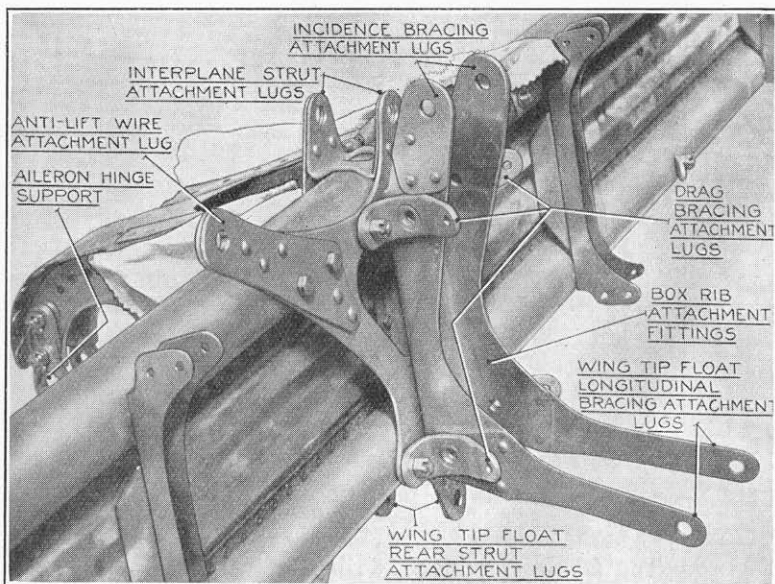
Bottom main plane rear spar interplane strut, box rib and wing tip float strut attachment fittings (port).
